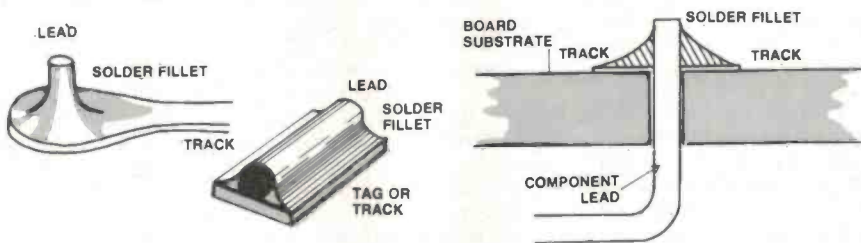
A good joint will be covered by a small fillet of solder which meets the parts of the joint at a tangent. The solder should be smooth and bright.
